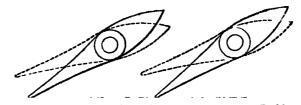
Adjustable guide blades for Parallel Flow Turbine.
